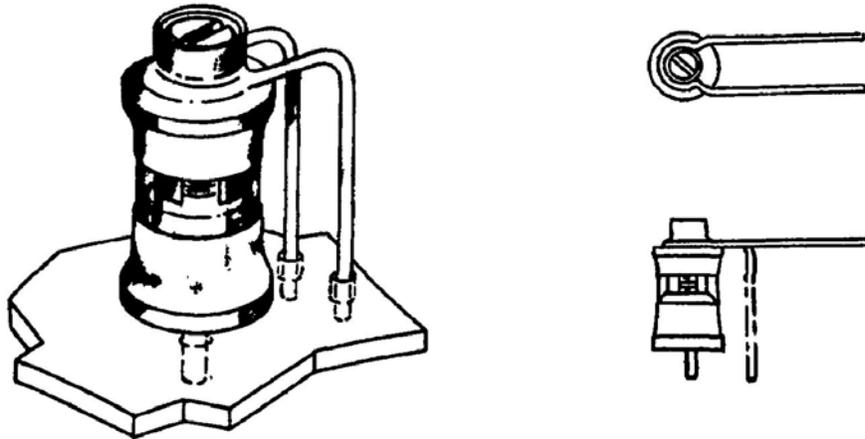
Vertically mounted printed circuit board sealed style (sealed).
